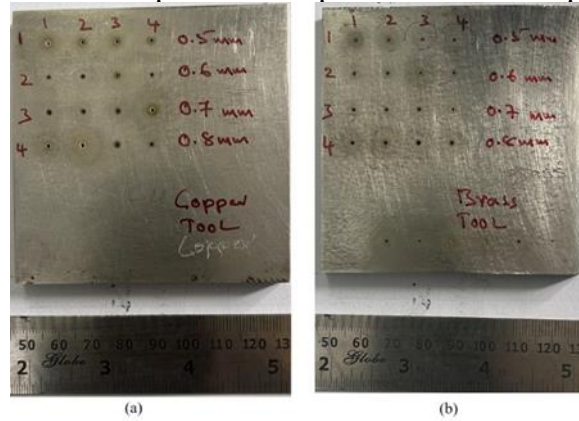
Specimen after EDD with (a) copper tool and (b) brass tool.
